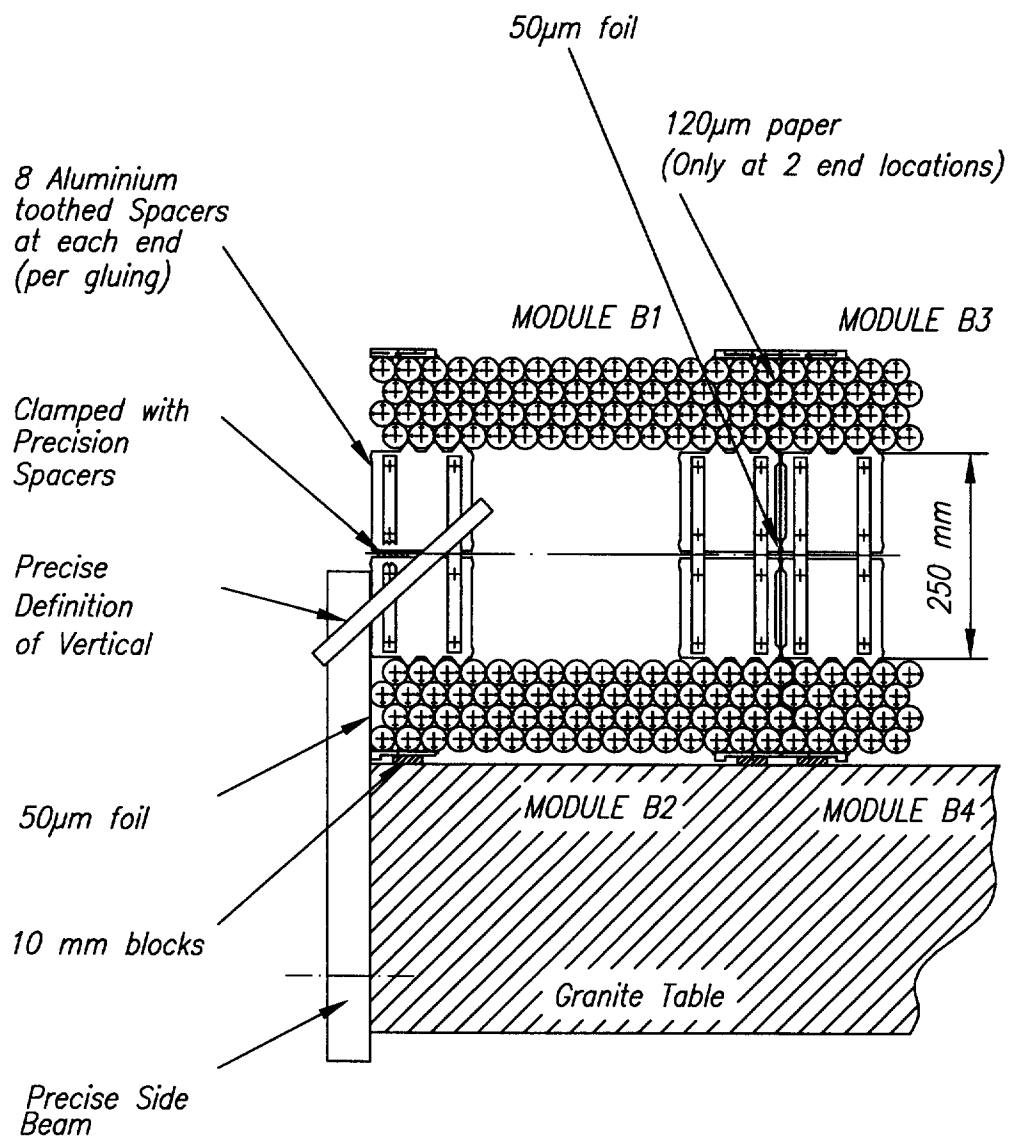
Sketch of arrangement used for attaching first four modules to the frame (which is not shown, but rests just within the sets of toothed spacers). The final assembly is given in Ref [1].
